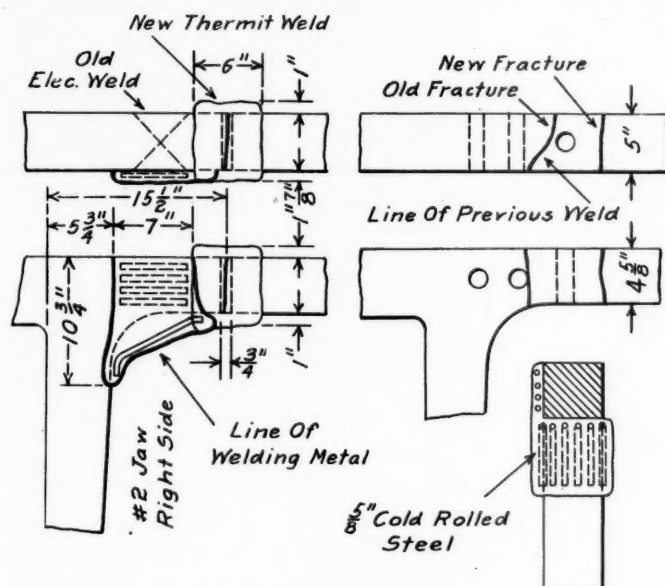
Cast Steel Frame Thermit Weld
